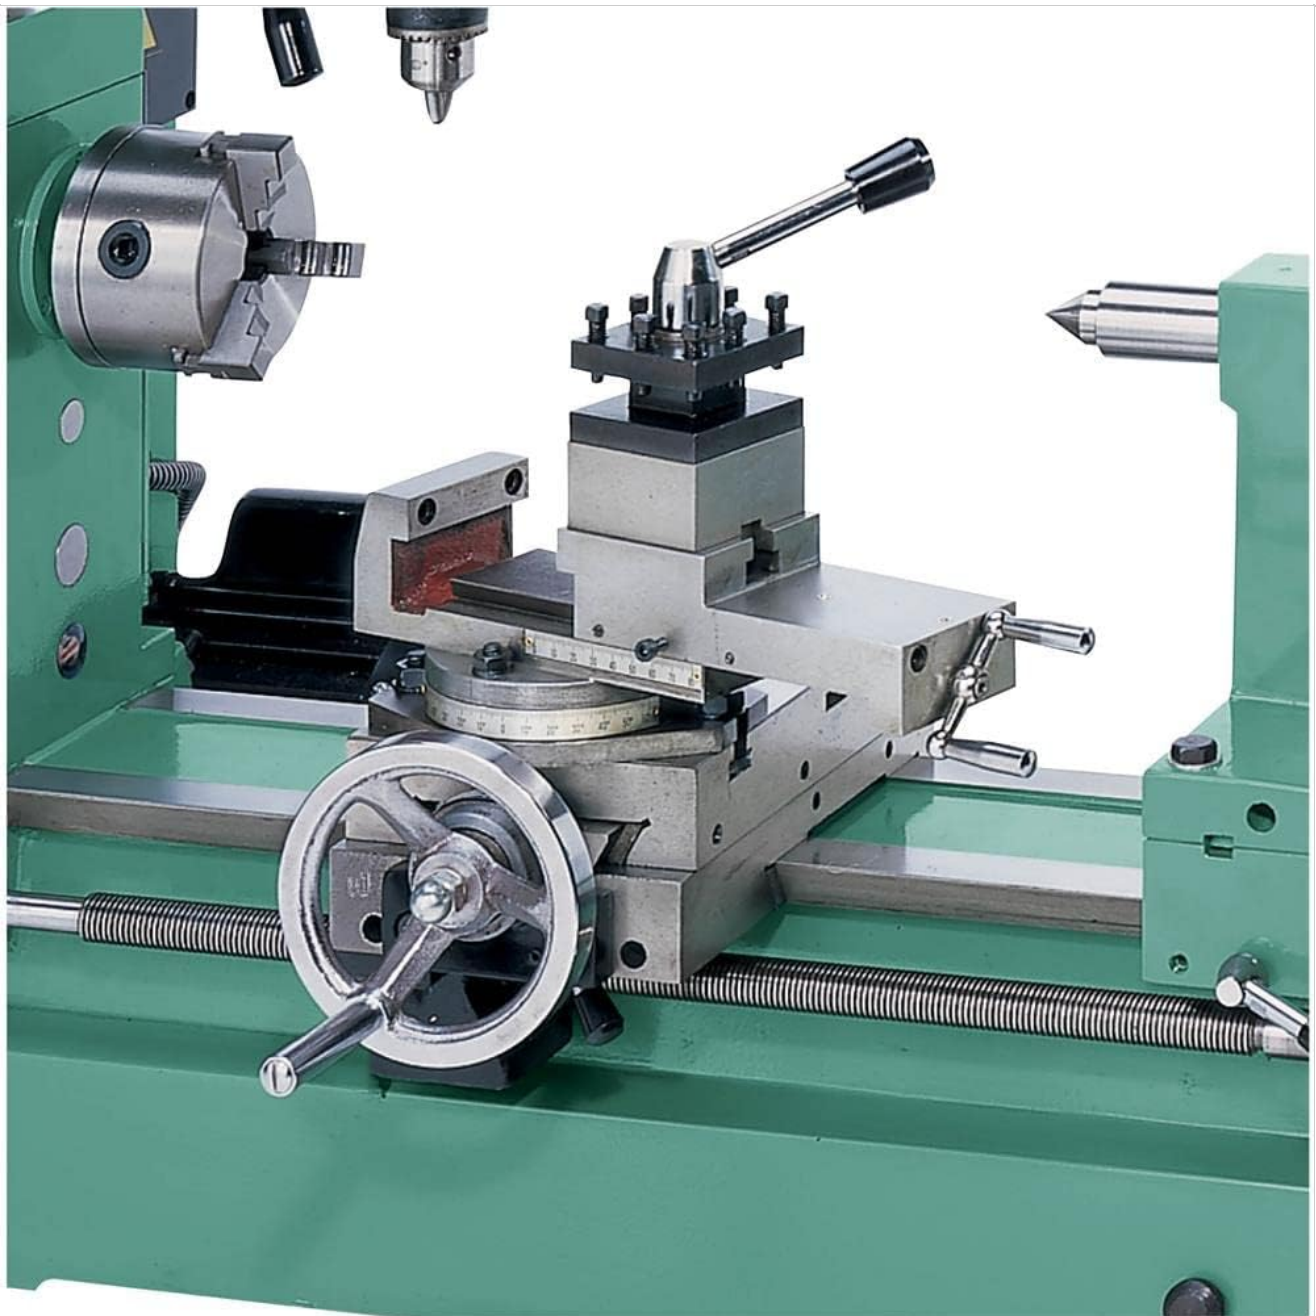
Close-up of the lathe carriage, cross-slide, and tool post, showing the controls for precise material removal.
